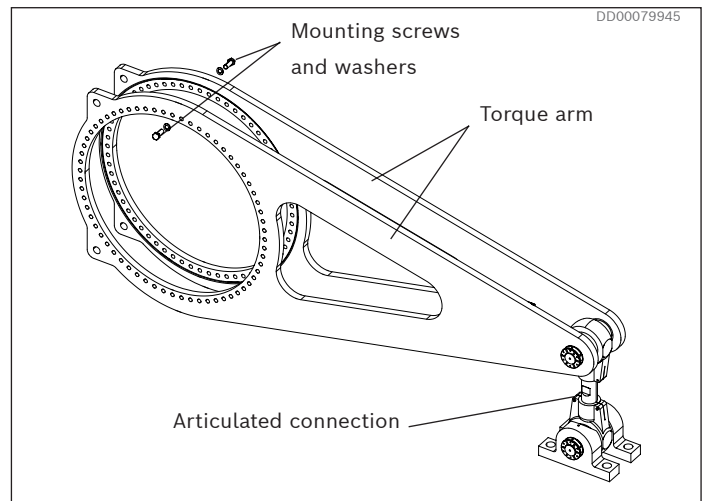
Example single ended torque arm with mounting screws, washers and articulated connection
